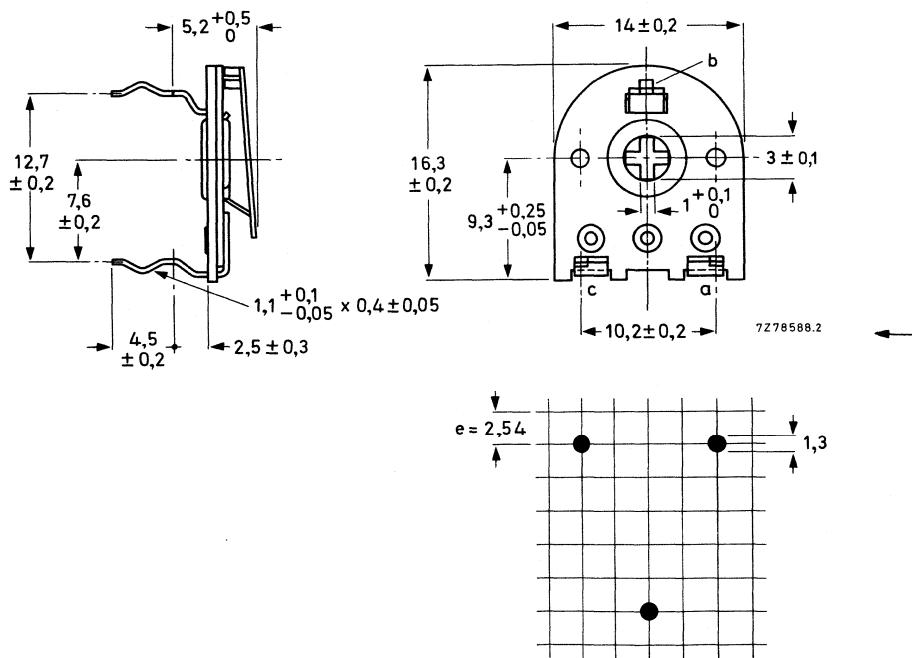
Potentiometer for horizontal mounting, with snap-in printed-wiring pins, 2322 409 033..
